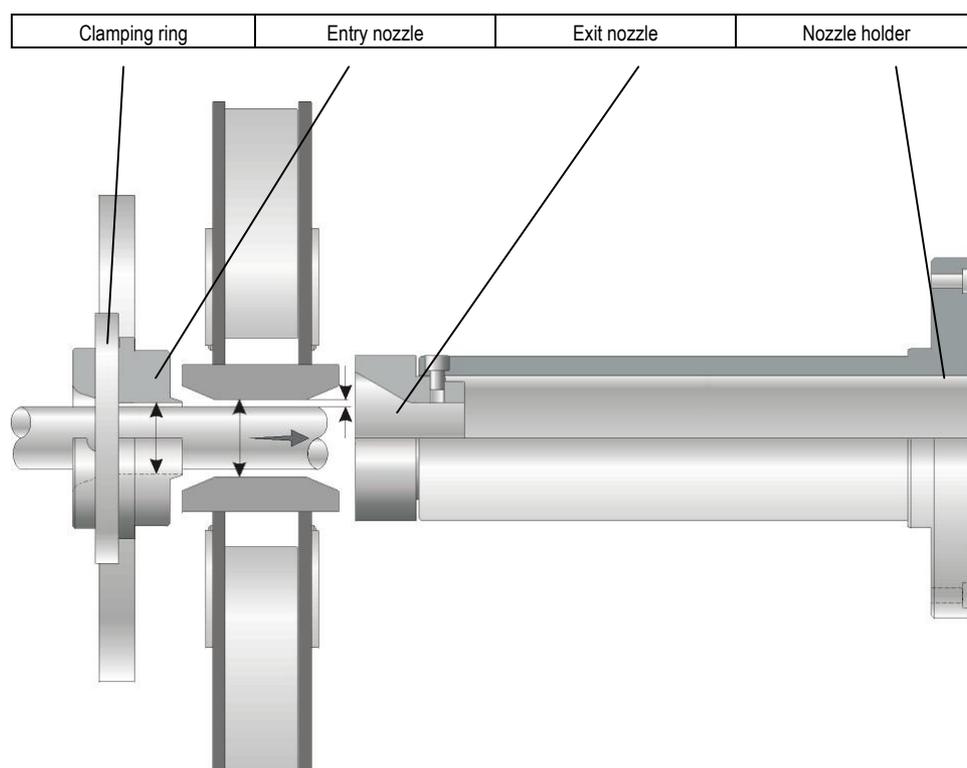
Protective nozzles, drawing machine, main picture, test heads and exchangeable nozzles
